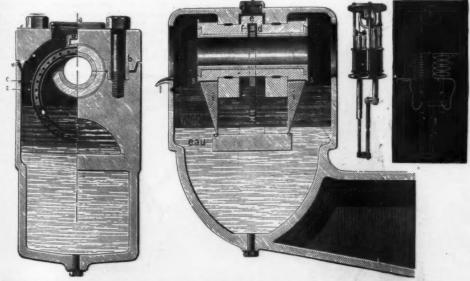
SHAFT OF THE DYNAMO WITH A RING FORMING A FLY WHEEL
